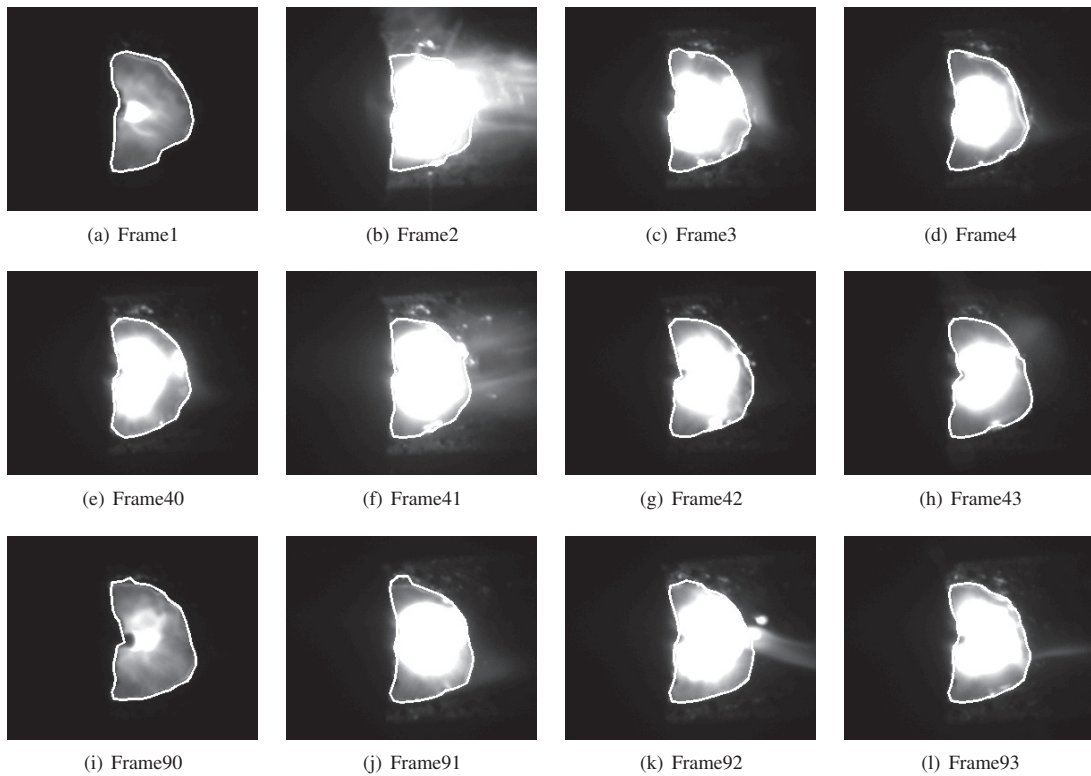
Experiment 2. This figure shows tracking results of weld pool boundaries in the case of a second layer welding. It can be seen that the weld pool boundaries are quite different from the first layer welding presented in experiment 1.
